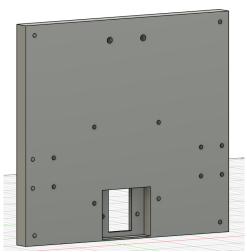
Chassis Design: Fusion360 model for the bottom plate of the WitBot chassis
